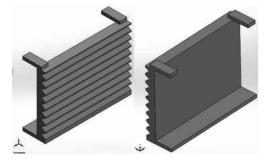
3D model of clamps (front and back isometric view)-metric thread
